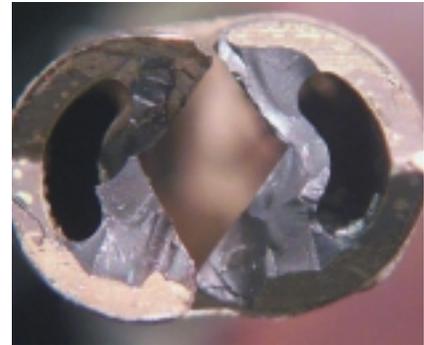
An analysis of fractured surfaces shows pieces of carbide still attached to the shank, meaning the brazing was stronger than the tip itself.
